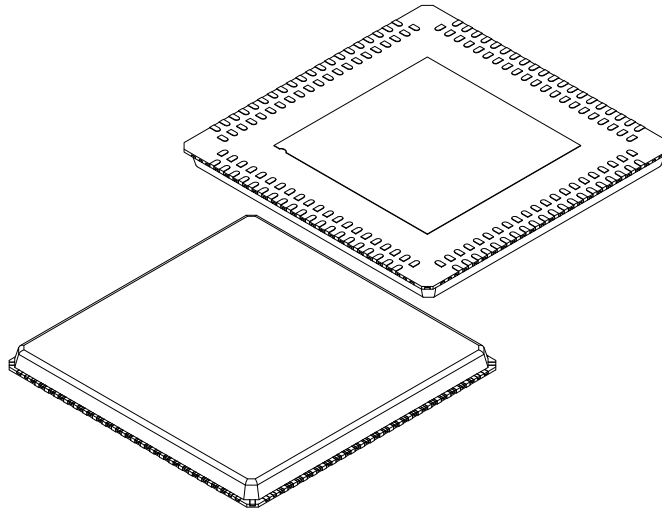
164-DRQFN PACKAGE (DIMENSIONS)
